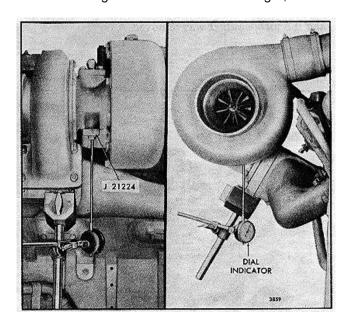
Indicator Mounting for Checking Shaft Radial Movement
